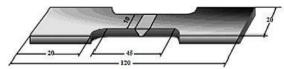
Dimensions of the tensile test specimen of the MMC welded joint prepared as per the ASTM E8M standards used in the present investigation.
